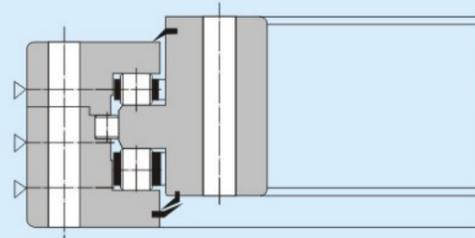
Three-row cylindrical roller combined bearing without gear
